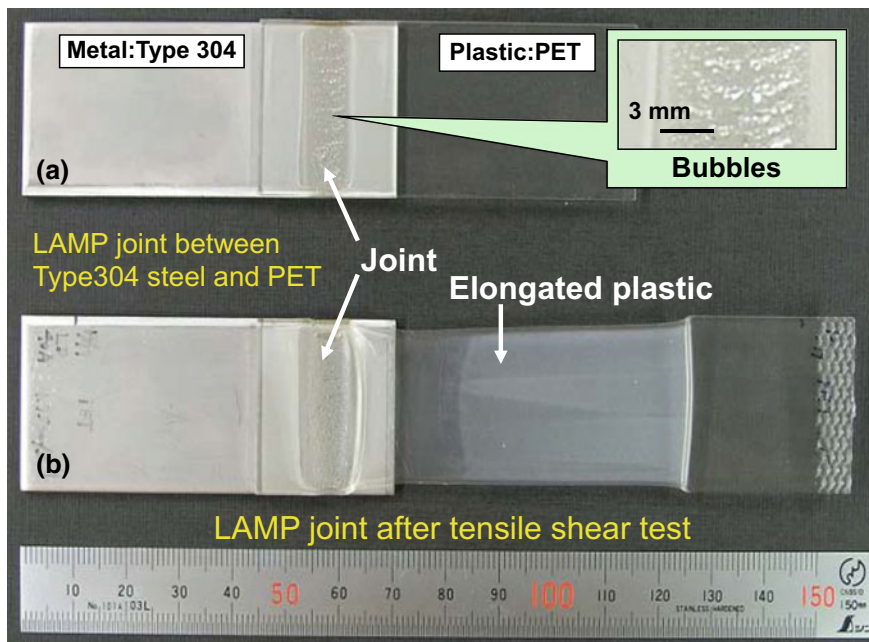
Laser lap joints of 3-mm-thick type 304 steel plate and 2-mm-thick PET plastic sheet before and after tensile shear test, showing that bubbles are formed in melted zone in PET during joining and that elongation of PET base plastic occurs during testing
